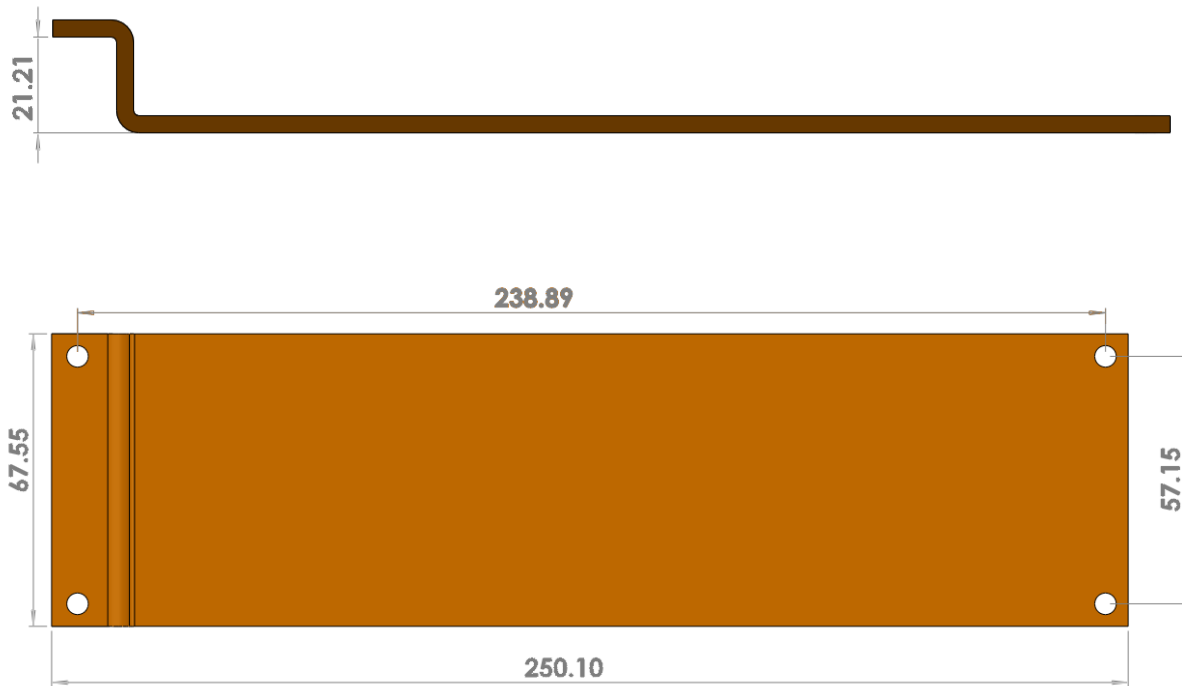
Relative Locations of Payload Bay Mounting Holes (units in mm)
